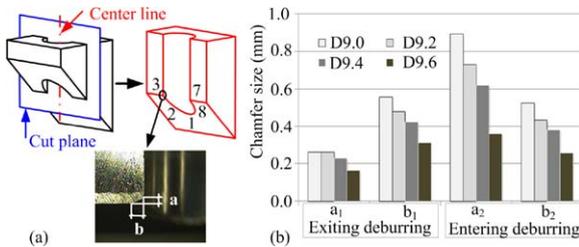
(a) Definition of cutting plane and chamfer size. (b) Chamfer size of drilled hole after deburring with exiting deburring ( $a_1$ ,  $b_1$ ), entering deburring ( $a_2$ ,  $b_2$ ), tool 2, a spindle speed of 700 rpm, a feed rate of 28 mm/min, and an inclination angle of 15°.
